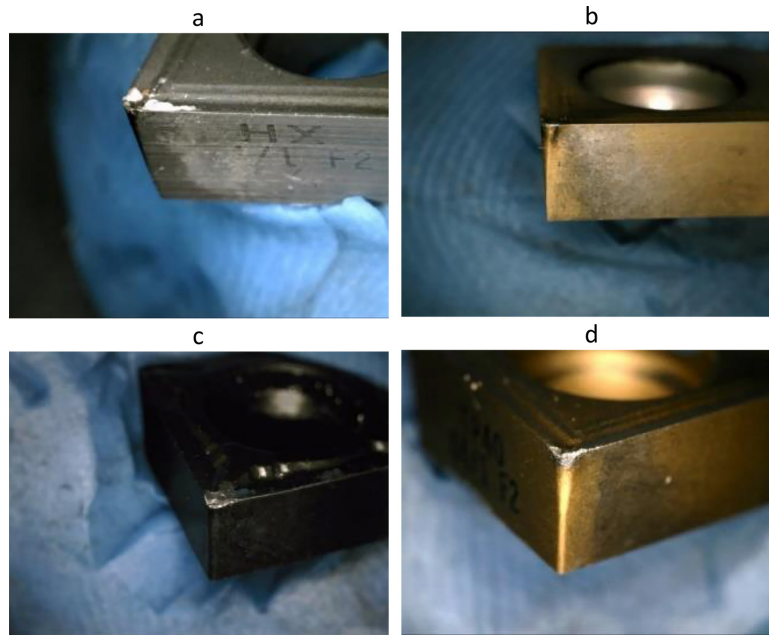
Photos of inserts after turning tests of the Ti_6Al_4V alloy at a cutting speed of 70/min; a) HX uncoated tool; b) CP200 tool with (Ti, Al) N+TiN coating; c) TH1500 tool with Ti(C,N) + Al_2O_3 coating; d) TP40 tool with TiC/Ti(C,N) + TiN coating
